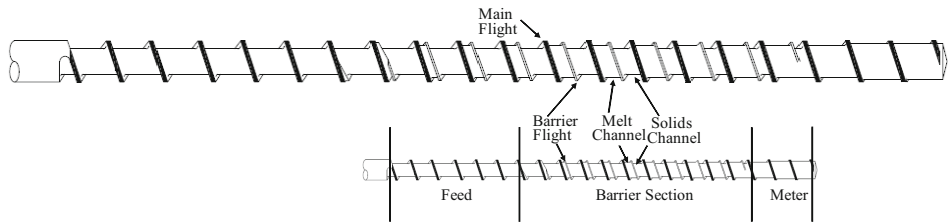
Schematic for a barrier melting section (courtesy of G. A. Campbell and M. A. Spalding, *Analyzing and Troubleshooting Single-Screw Extruders*, 2nd ed., Hanser (2021))
